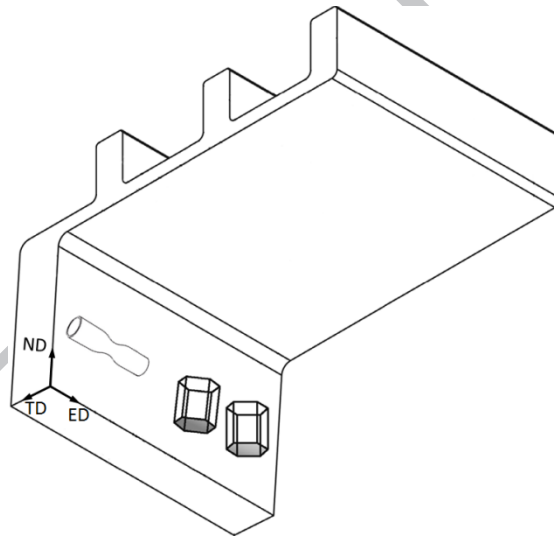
Schematic illustration of extrusion section showing crystal orientation in portion used for machining tubular specimens.
